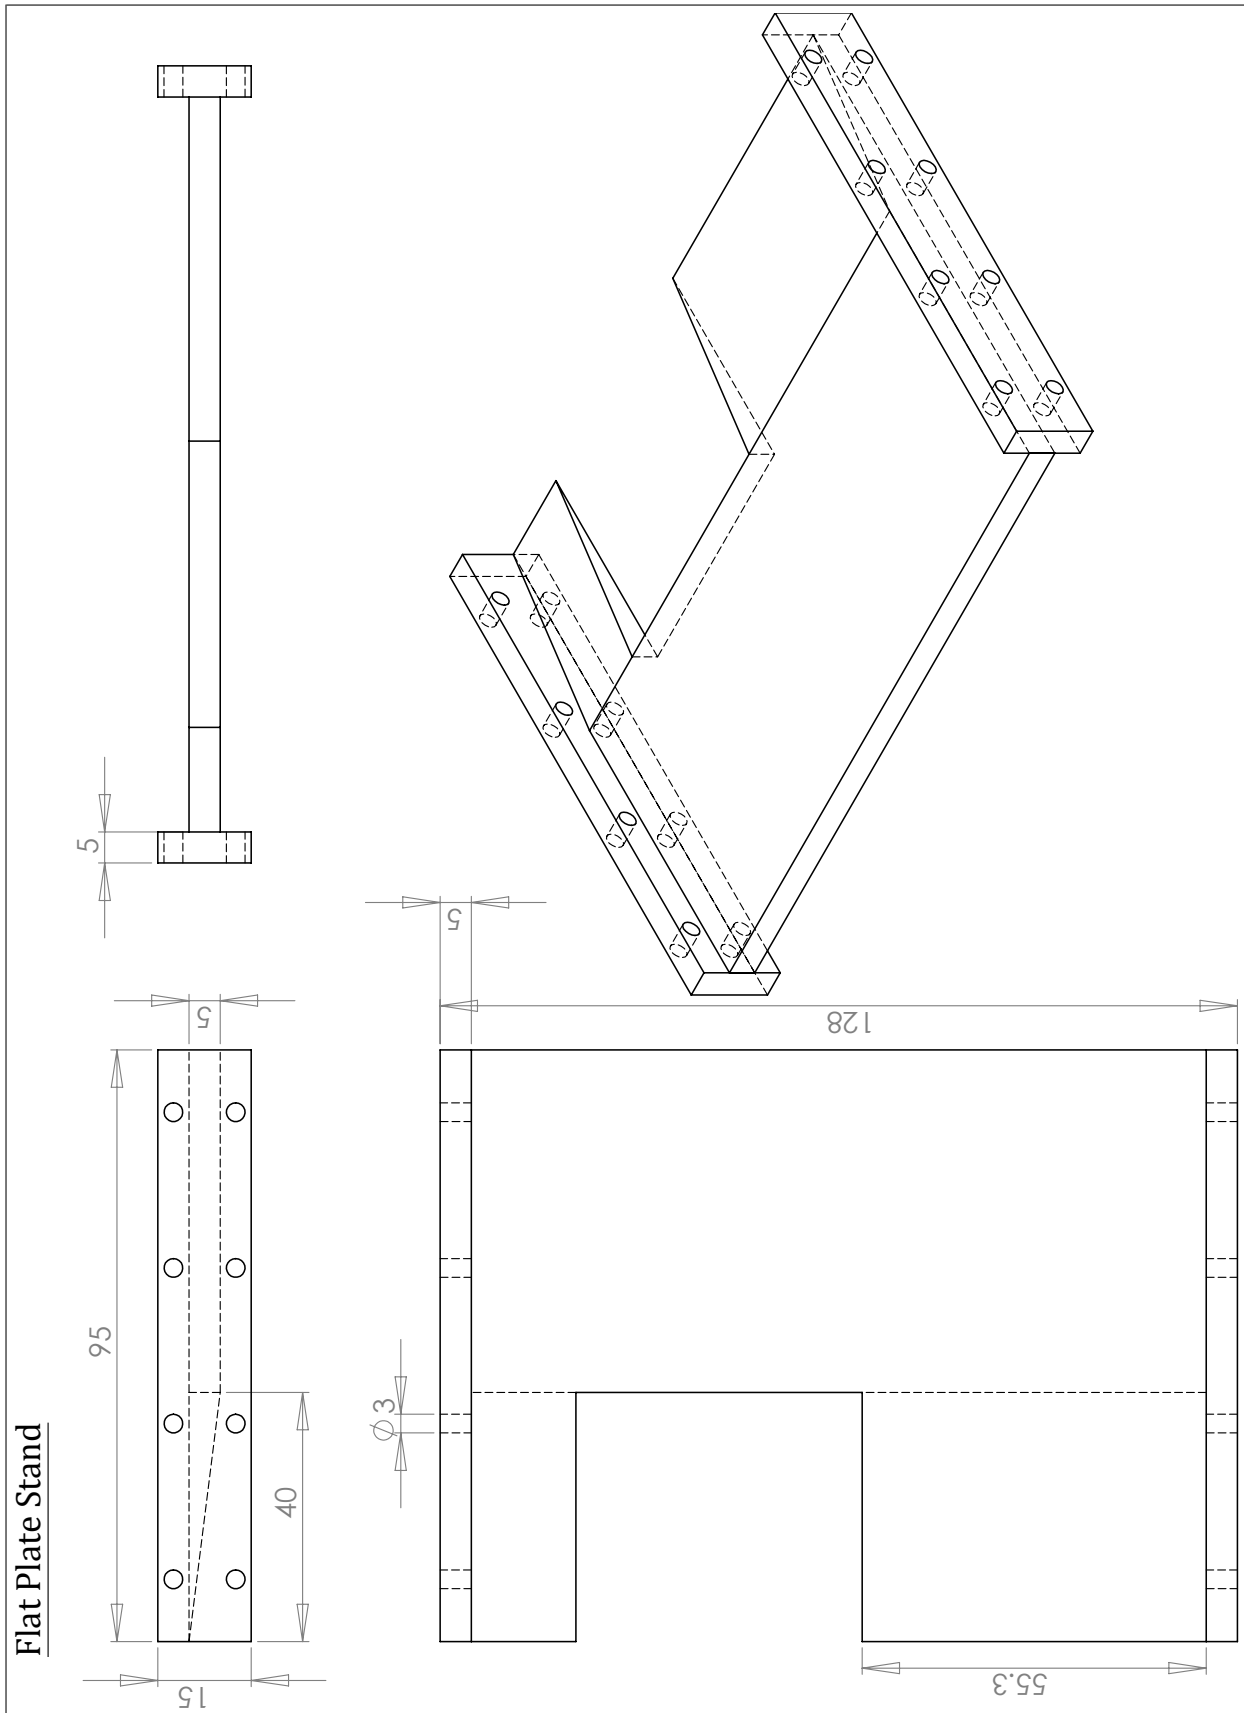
CAD drawing of vertical stand for flat plate mounted inside test section.
